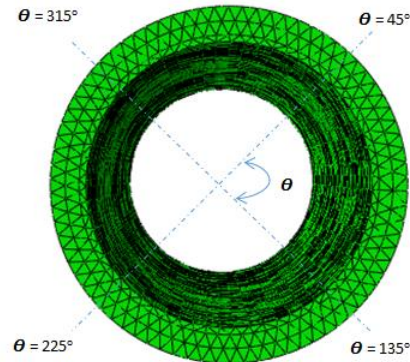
Cross section view of the pipe circumference illustrating the order of weld direction
